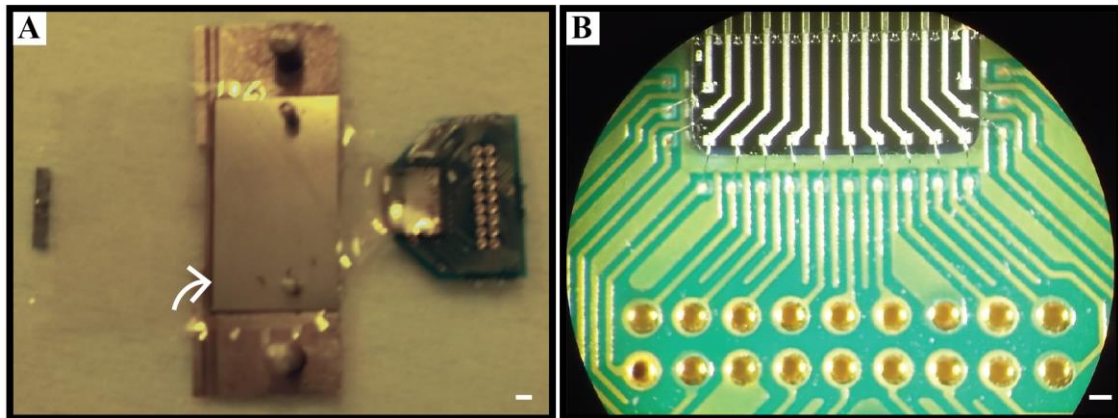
Assembly of polyimide foils into cuffs. A) Clamping of polyimide foil in the 1 mm thick vertical rods, preparing the foil for being curved and folded over the cylindrical horizontal rod with 0.8 mm diameter. The following assembly step is the folding indicated by the curved arrow. Scale bar: 1 mm B) Close-up of PCB, showing bonding wires and the 18 gold plated vias for mating of the Omnetics 18-pin neuro connector. Scale bar: 200 μ m.
